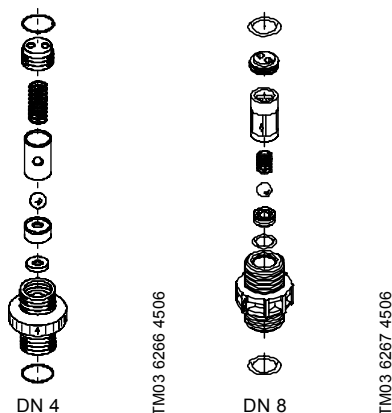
Spring-loaded DN 4 valve / spring-loaded DN 8 valve
